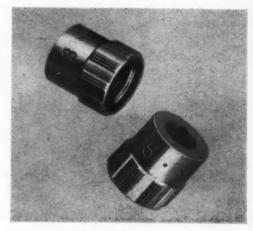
This safety-razor component, which requires 13 operations, is produced in 4.5 sec. on a &-in. Acme-Gridley 6-spindle automatic
